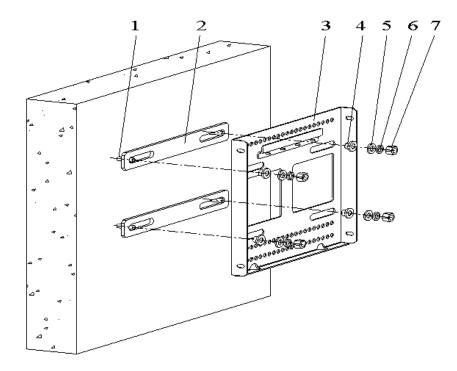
SUPPORTING PANEL INSTALLATION ON WALL
